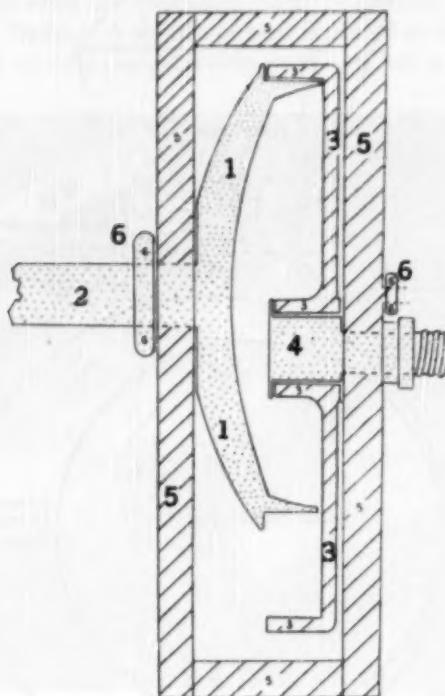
Cross section, top view. 1. Inner crusher wheel integral with driving shaft No. 2. 2. Shaft which supports and drives inner crusher wheel. It is connected by a rigid coupling to the reduction gear. 3. Outer crusher wheel. 4. Stationary, offset shaft which supports outer crusher wheel. Turning this shaft adjusts crushing clearance. 5. Steel frame which supports crusher wheels, and rocks in frame supports, No. 6. 6. Supports for frame.
